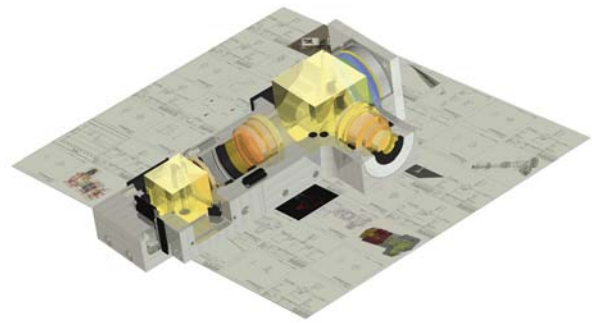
Optical and mechanical 3-D modelling combined with CMC machining enables design and manufacturing of high resolution optics needing no optical adjustments.
